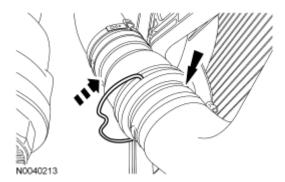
Identifying Lower Radiator Hose And Installing Retaining Clip Courtesy of FORD MOTOR CO.
